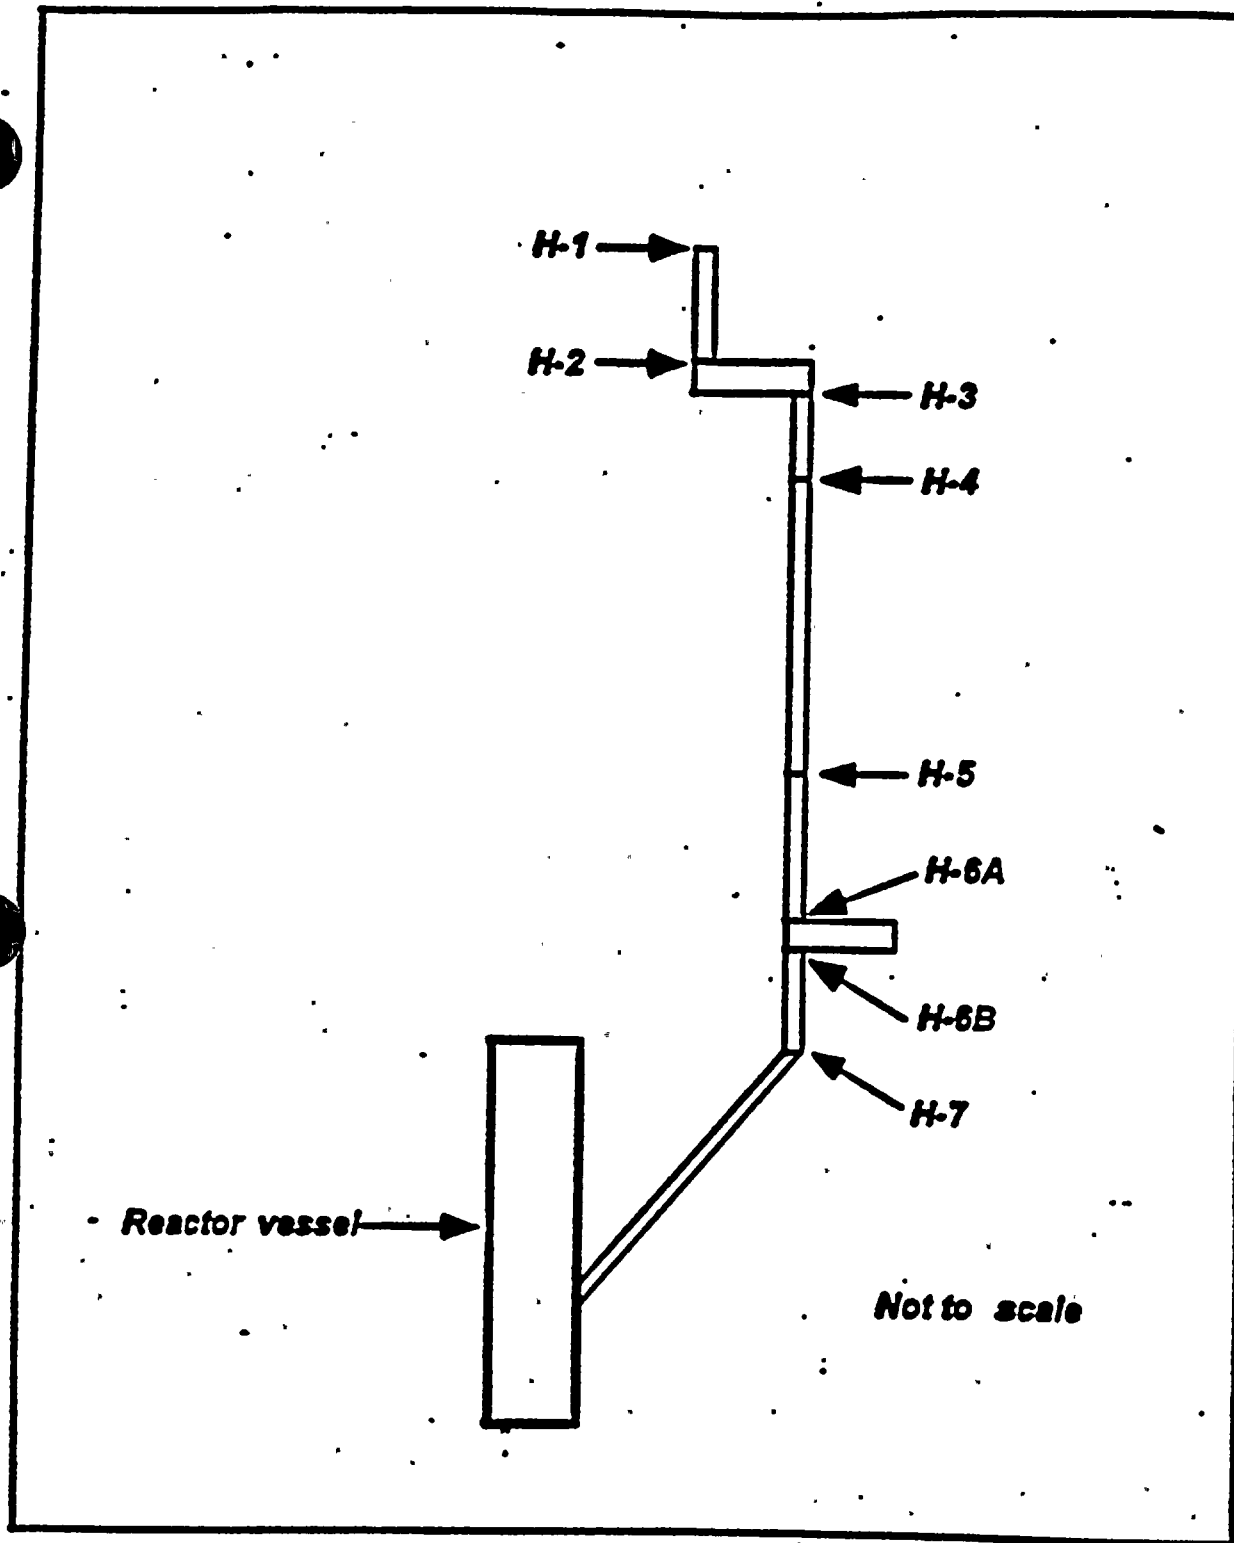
NMP1 Shroud Weld Locations, Cross Sectional View
